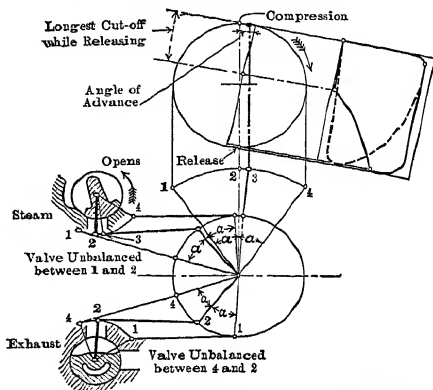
Wrist Plate Linkage for Rocking Valves.
